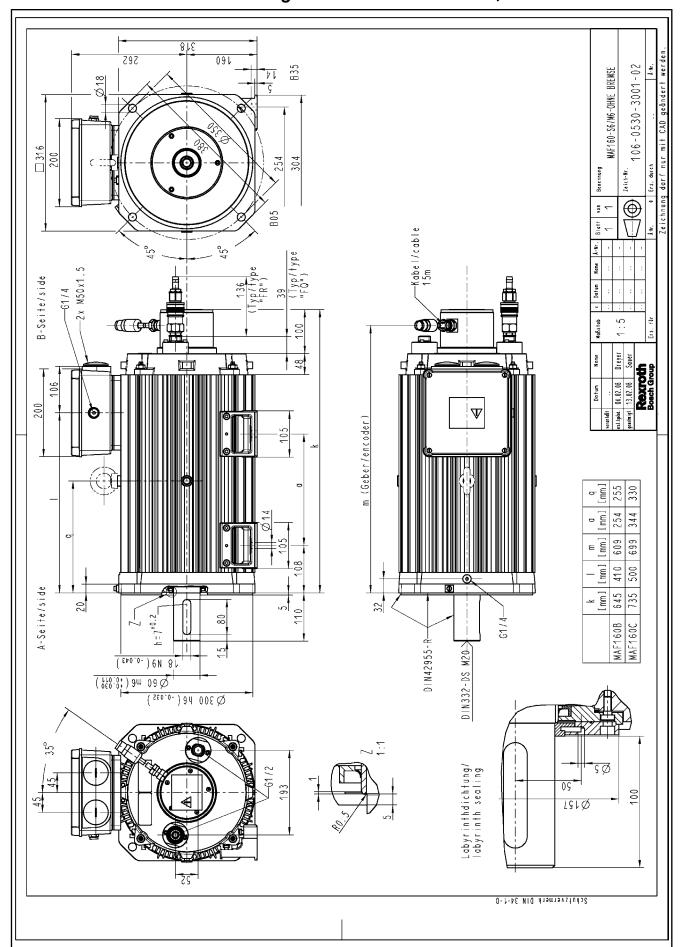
Dimension sheet MAF160 with brake 1 or 5
